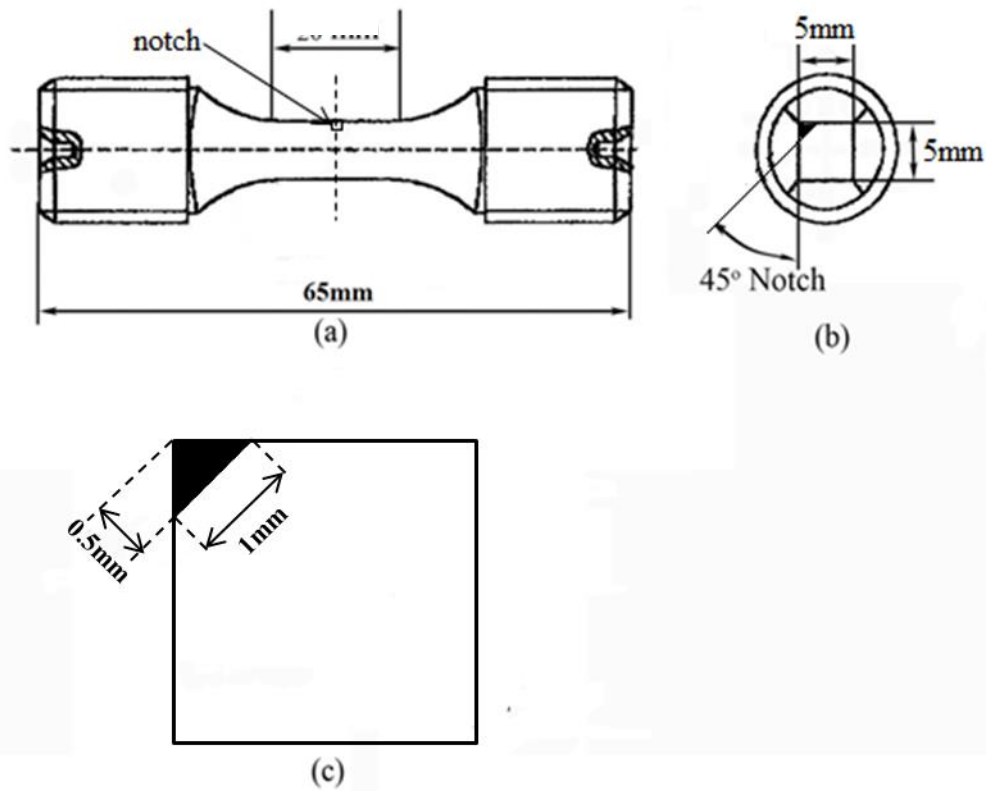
Schematic specimen geometry for fatigue threshold crack propagation testing: (a) geometry and dimension of the specimen; (b) position of the notch and cross section of the gauge; (c) depth and length of the notch.
